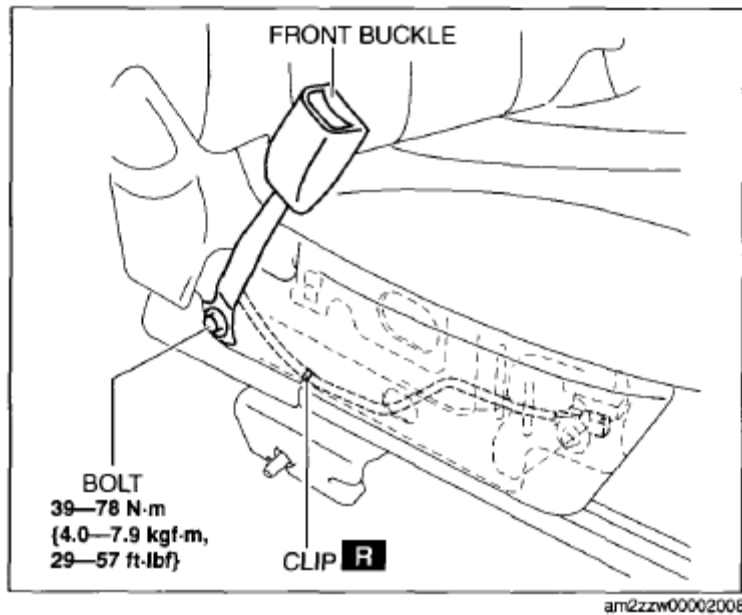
Identifying Front Seat Belt Buckle, Clip And Bolt With Torque Specifications Courtesy of MAZDA MOTORS CORP.
